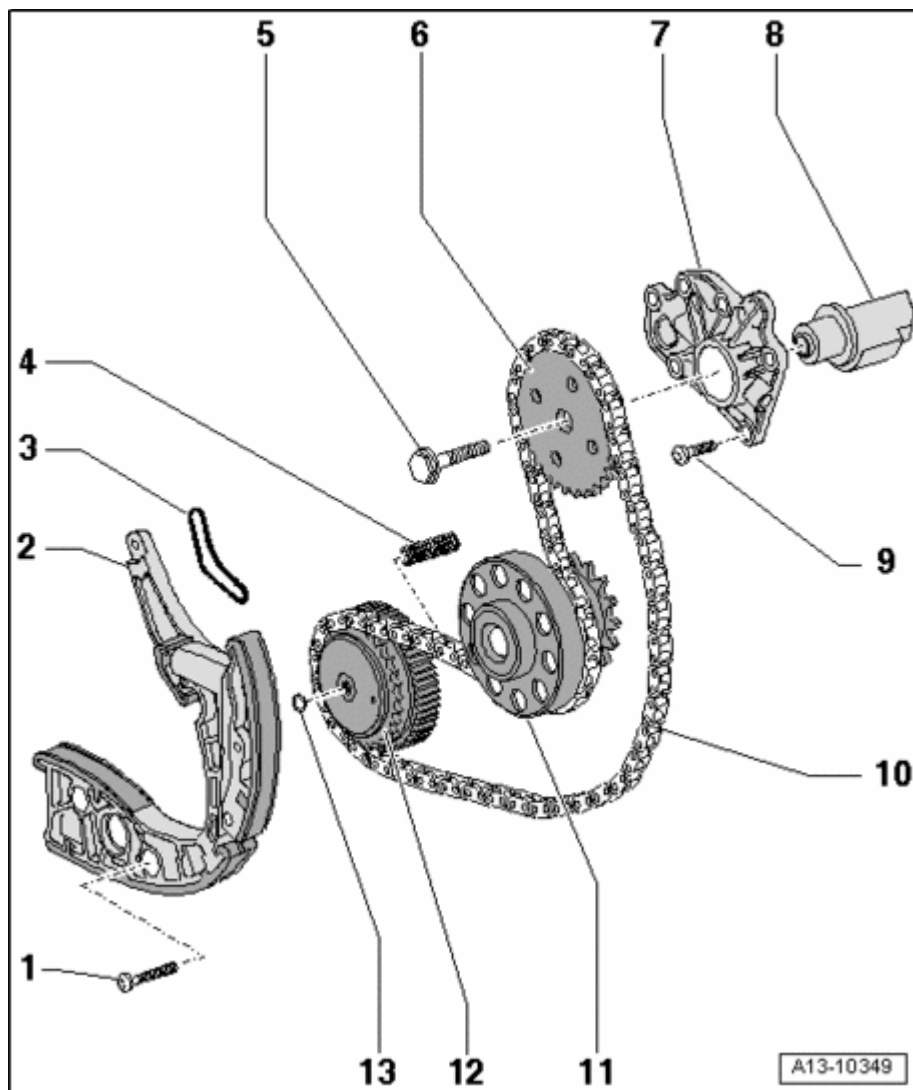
Power Take-Off Drive Chain, Oil Pump And Balance Shaft, Component Overview
